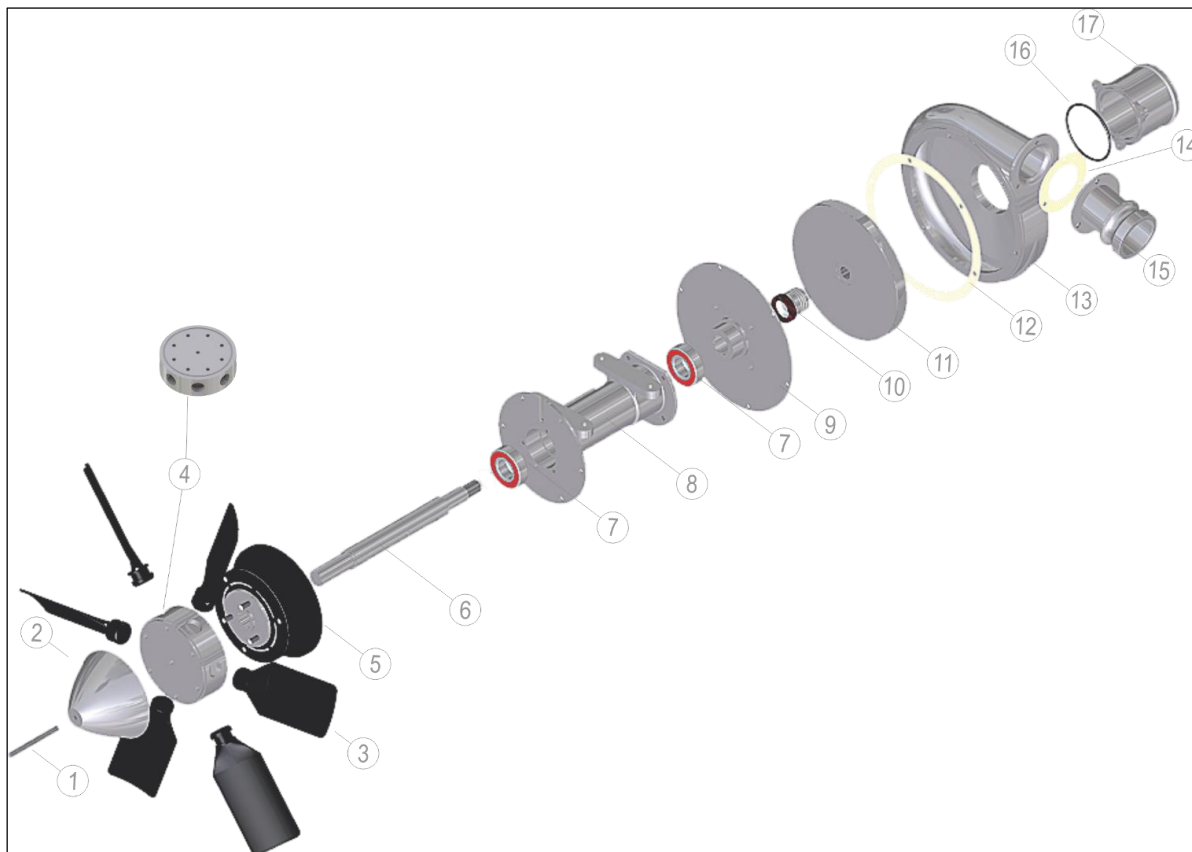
Zanoni Equipamentos® spray pump (exploded view - illustrative picture).
